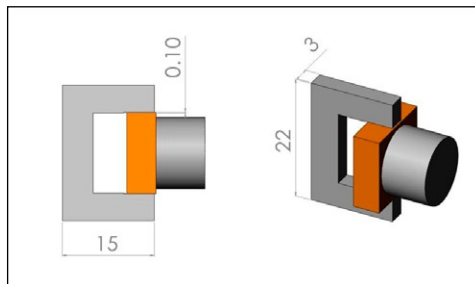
schematic picture of the U-shape specimen for cutting force measurement. Units are in millimeters
